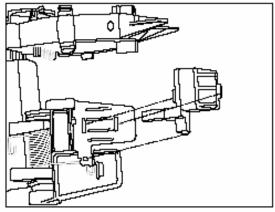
Remove clamp pads attached to each clamping arm on a mechanism where cable diameter exceeds 1°.
